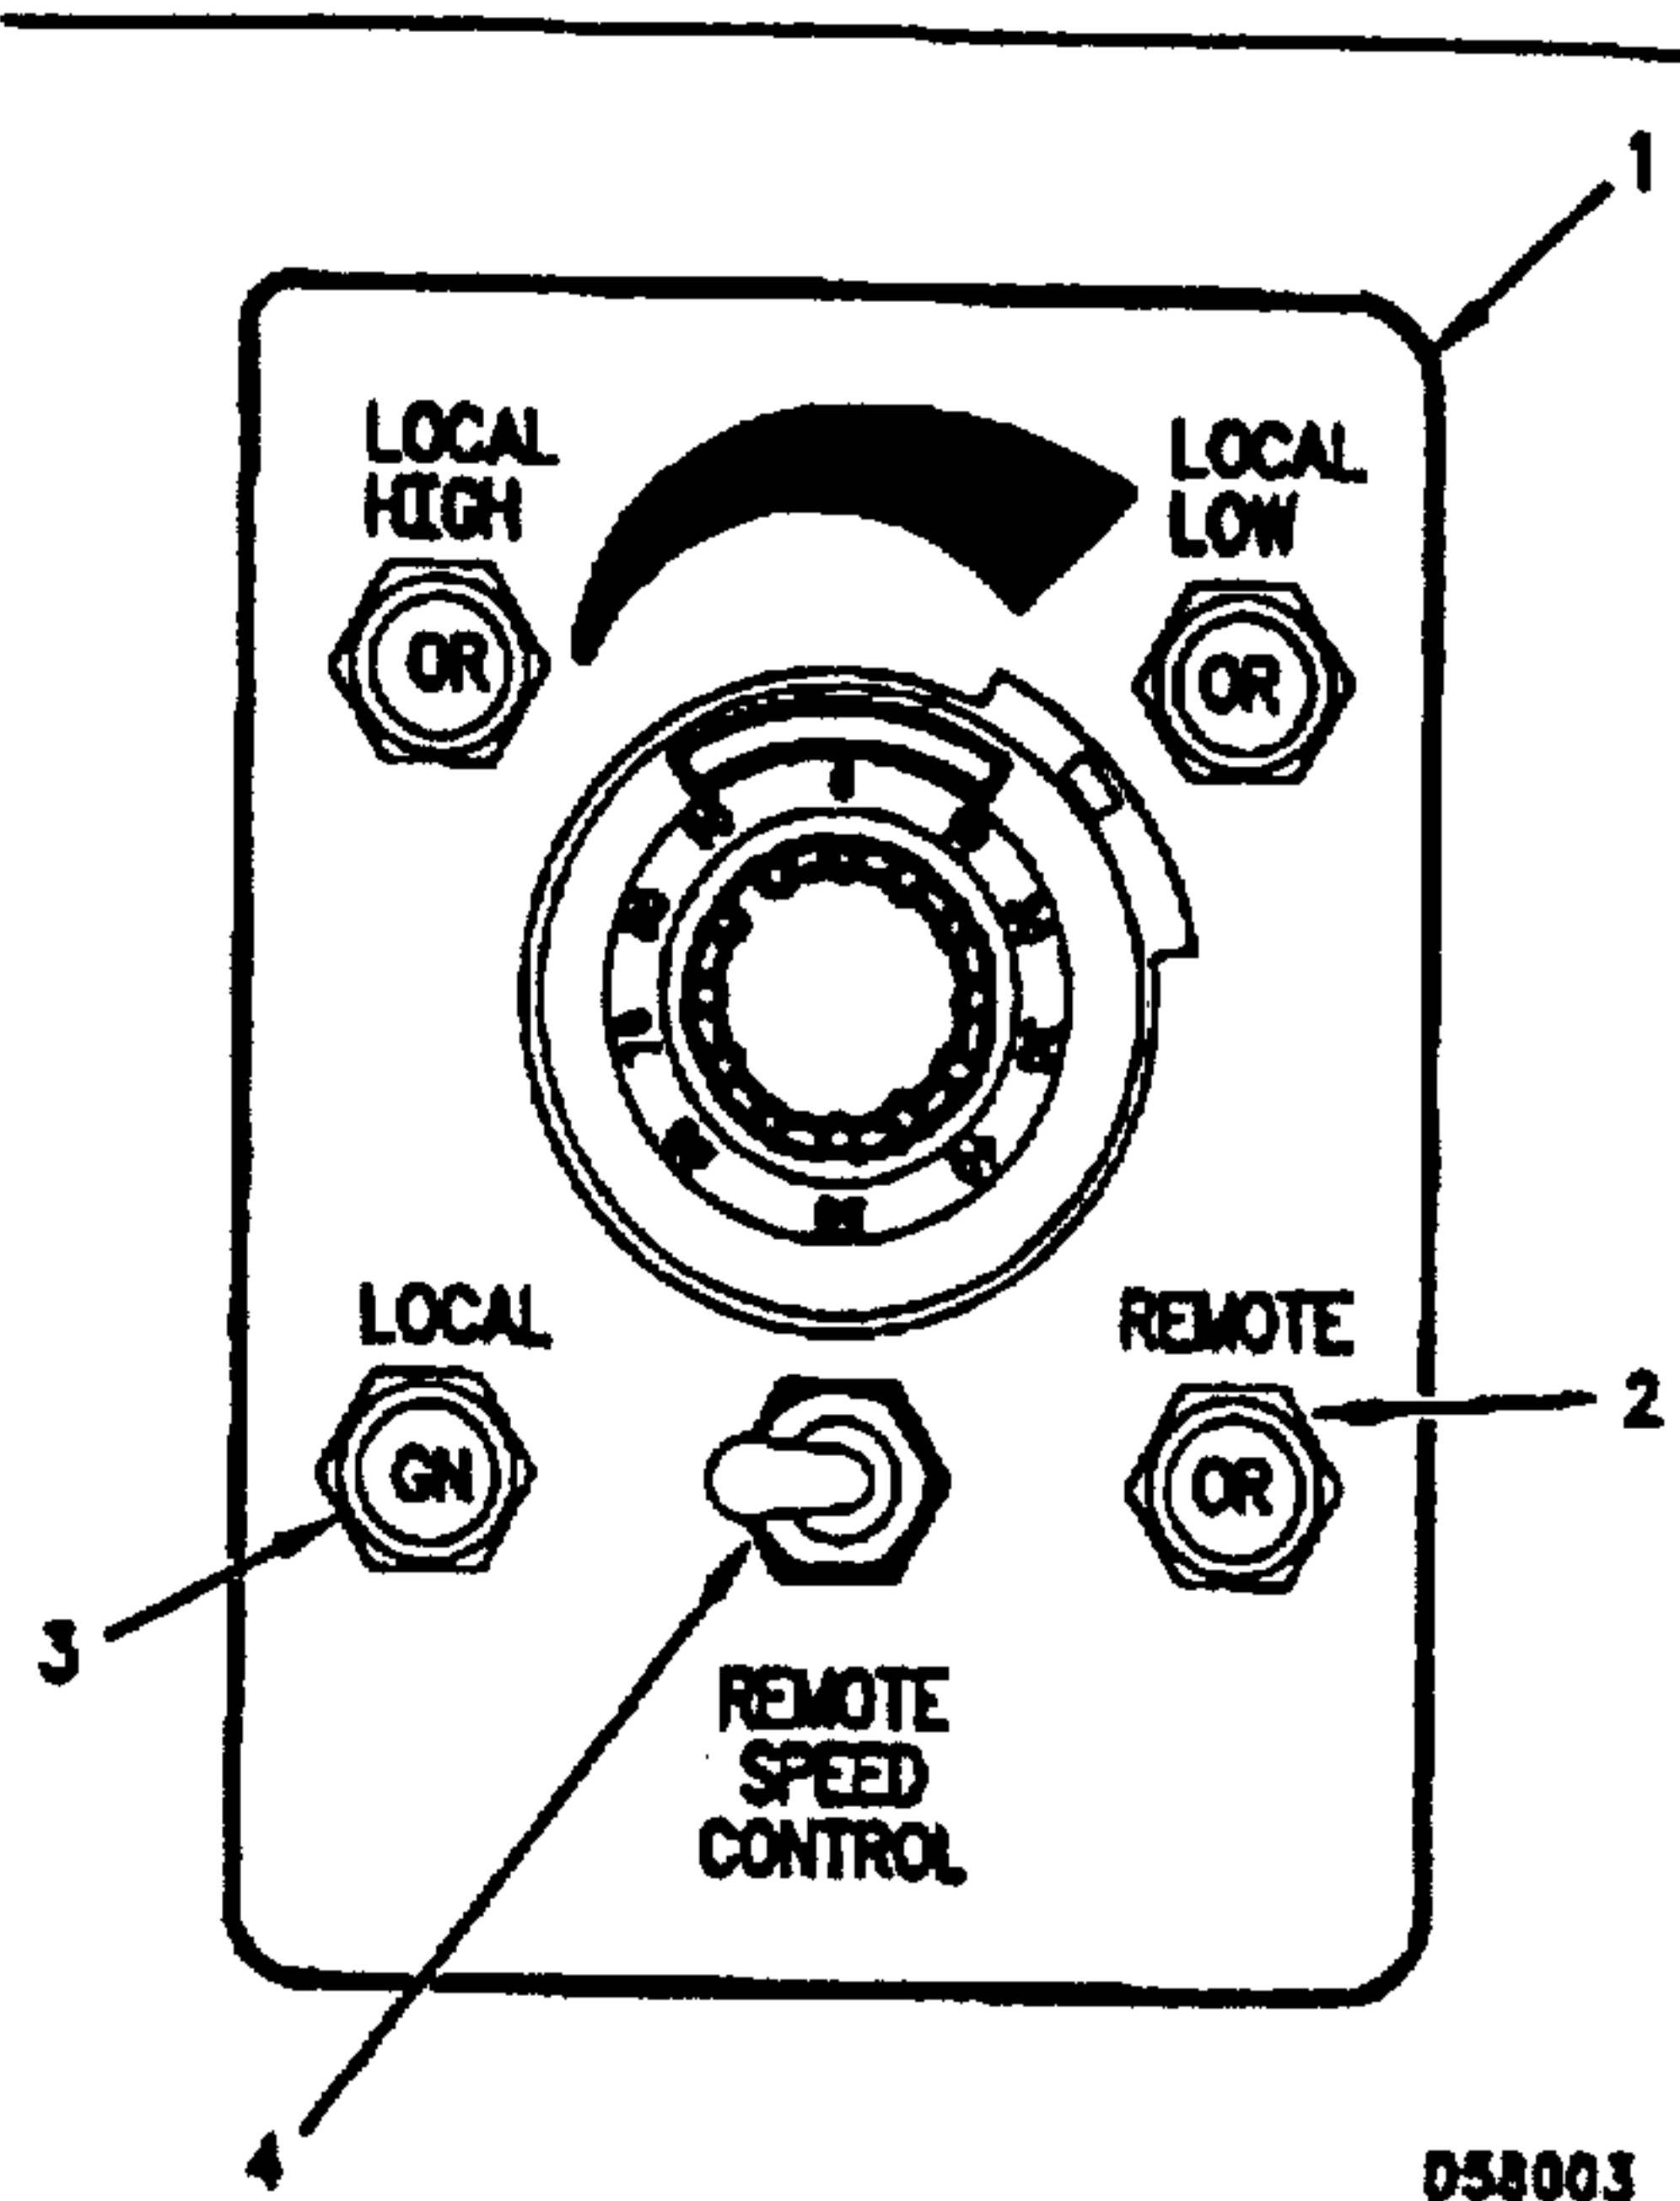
Film (Decal) On ESS Panel Door: (1) 130-2705 Film (Decal). (2) 130-2708 Indicator Assembly Lamp (Orange). (3) 130-2707 Indicator Assembly Lamp (Green). (4) 130-2704 Switch Assembly.
